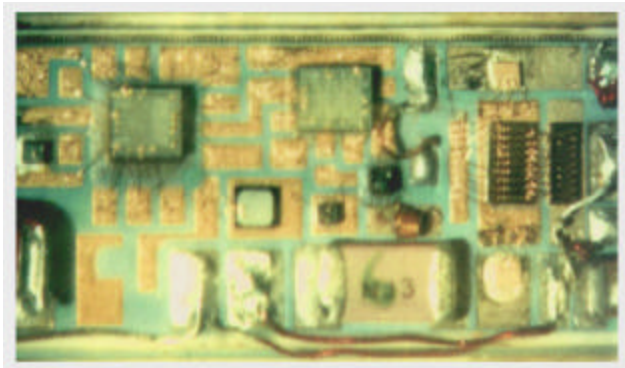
Micrograph of the PCB assembly prior to lapping and polishing processes. The primary area of interest are the Si die which are mounted to the board and the solder of the other components.
